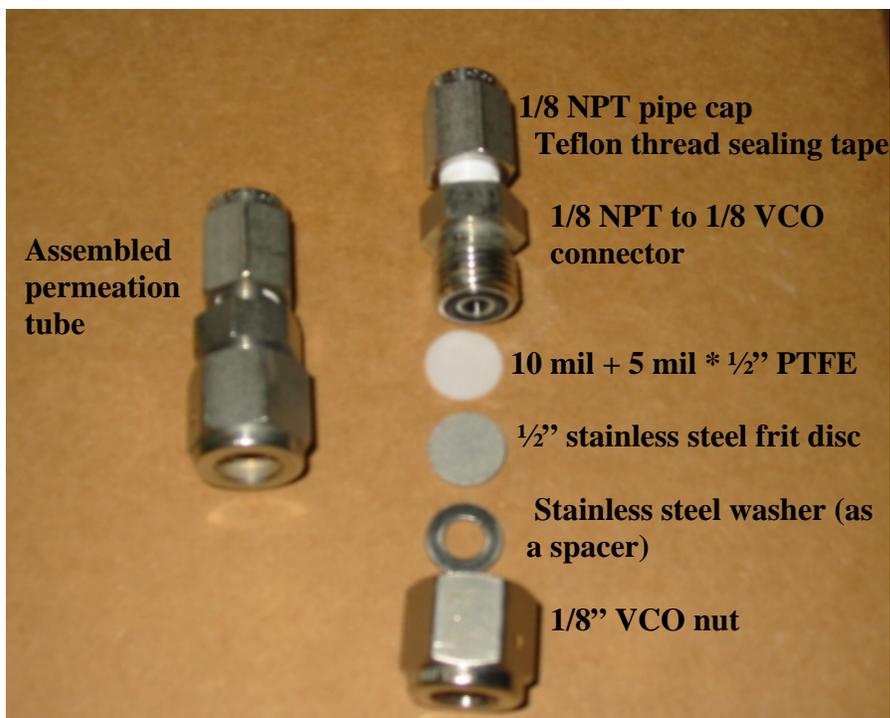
Assembled and exploded view of a permeation tube made from stainless steel fittings.
